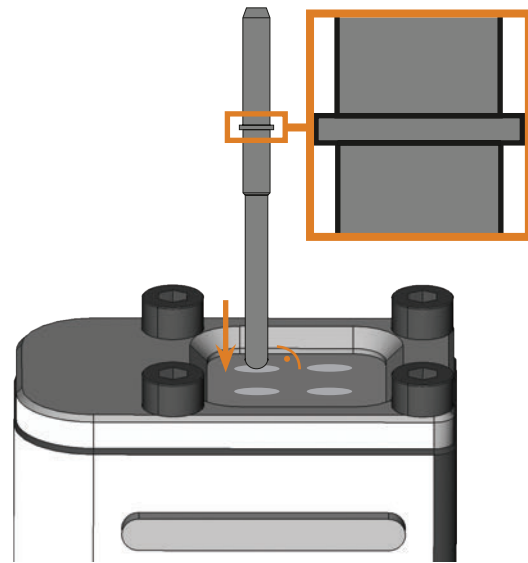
INSERTING TOOL STRAIGHT INTO THE TOOL POSITION; RING AT THE TOOL ENLARGED
